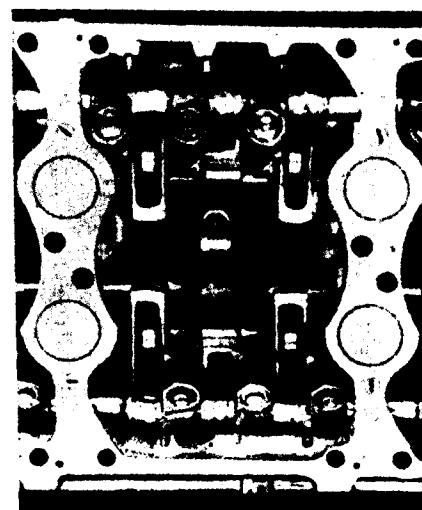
Part of camshaft casing showing the valve and fuel pump operating rockers.
